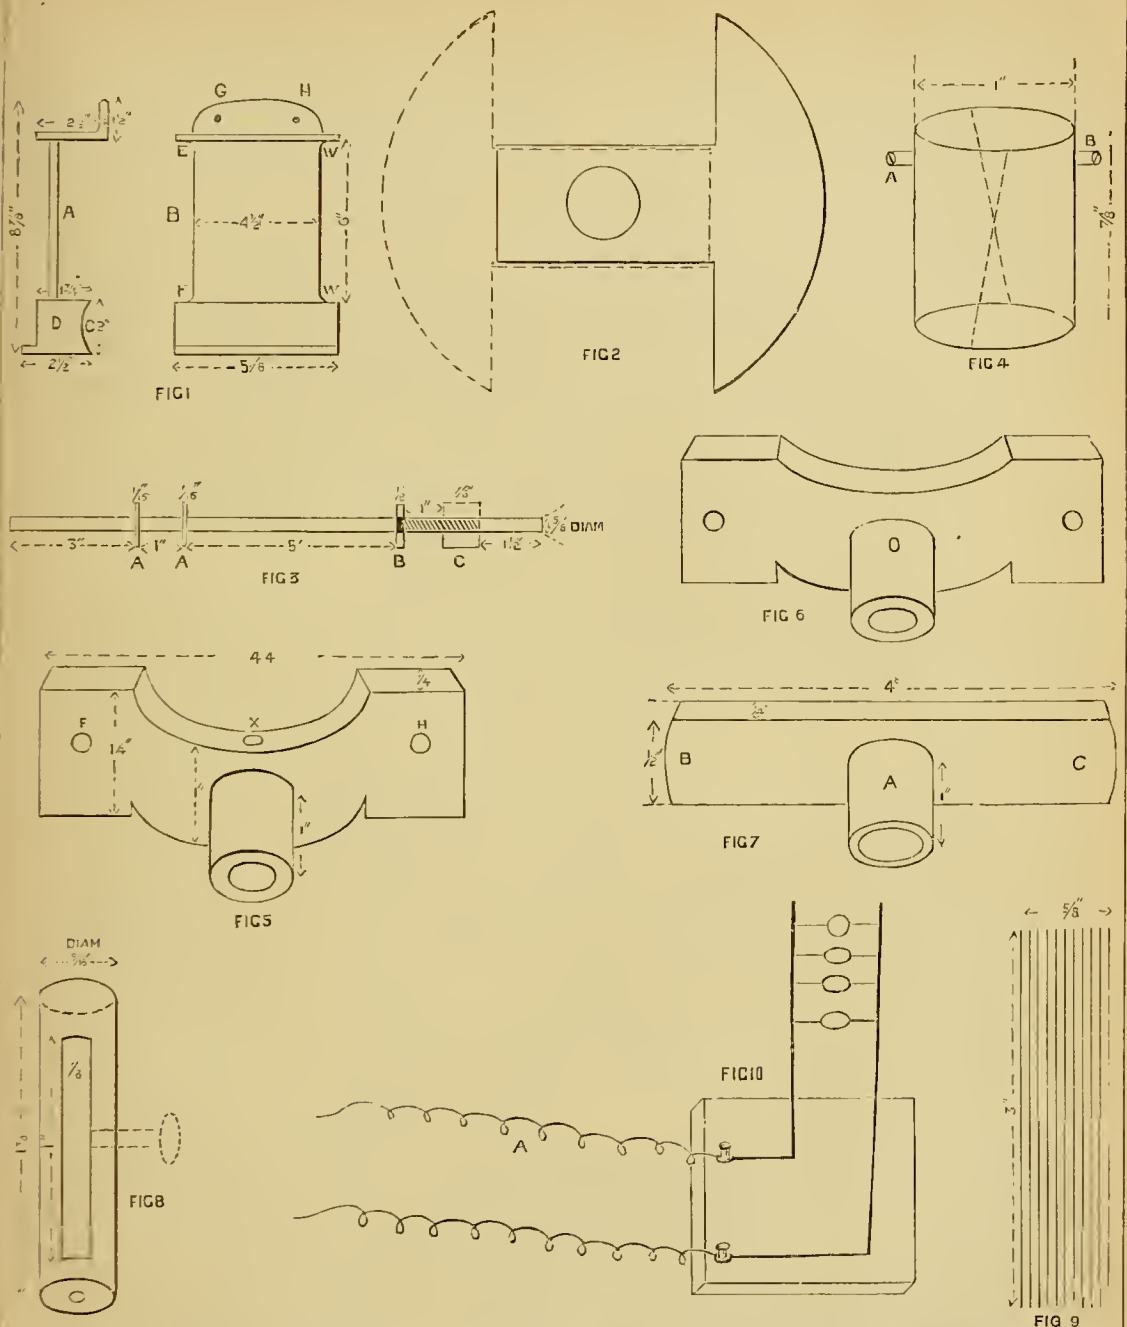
FIELD MAGNET—A, Side ; B, Back ; E F W W', Wire space, $\frac{5}{8}$ inch thick ; C, Armature Channel ; G H, Position of Holes in Top Flange. FIG. 2.—DISC OF ARMATURE, DRAWN TO SIZE. The dotted line shows how the Discs are built on the shaft. FIG. 3.—SHAFT OF ARMATURE—A, B, Collar and Nut between which the Discs are built ; C, Position of Commutator. FIG. 4.—THE COMMUTATOR, $\frac{1}{8}$ INCH THICK—A, B, Quarter-inch Screws. The dotted lines show the directions of the splits of the tube. FIG. 5.—THE FRONT BEARING. FIG. 6.—THE BACK BEARING. FIG. 7.—BRUSH SWIVEL. FIG. 8.—BRUSH HOLDER WITH SET SCREW. FIG. 9.—BRUSH. FIG. 10.—LAMPS ARRANGED IN PARALLEL ARCS—A, Wire leading to Dynamo.
